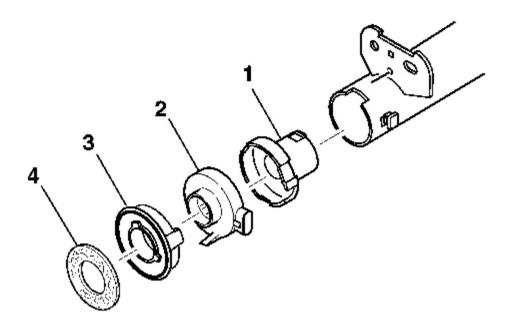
Steering Shaft Seal, Sensor Retainer, Sensor Assembly, Adapter & Bearing Assembly Courtesy of GENERAL MOTORS CORP.
